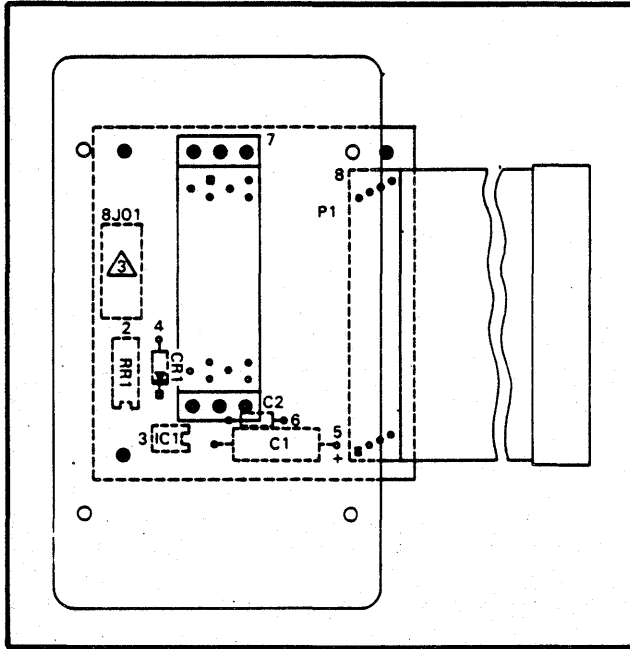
I/O CABLE ASSEMBLY (SHORT LINE DRIVER)
